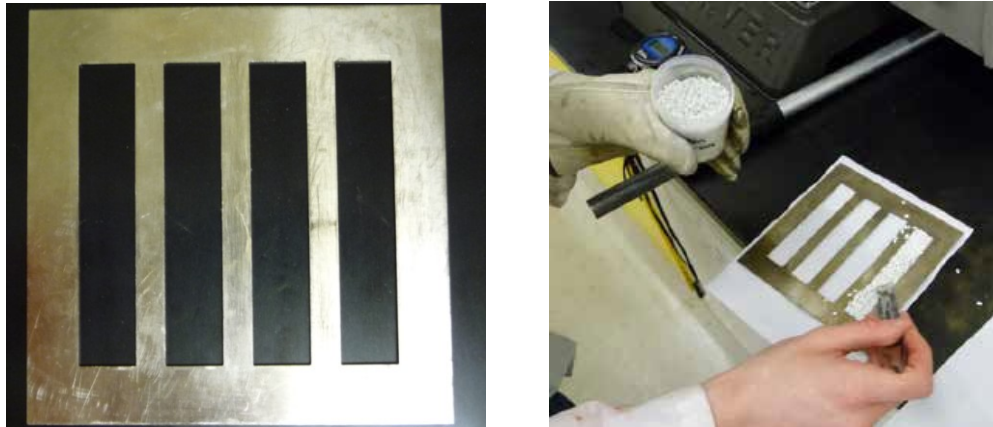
Mold for compression molding (left); filling of the mold with sample particles (right)
